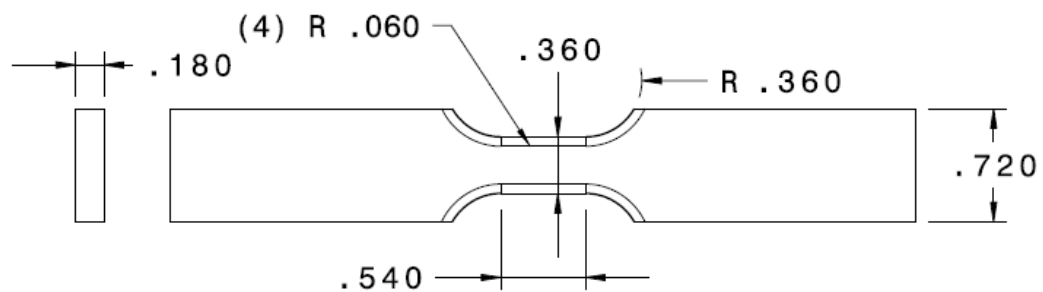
Drawing of flat straight gage specimen used for interrupted fatigue testing (Dimensioned in inches)
